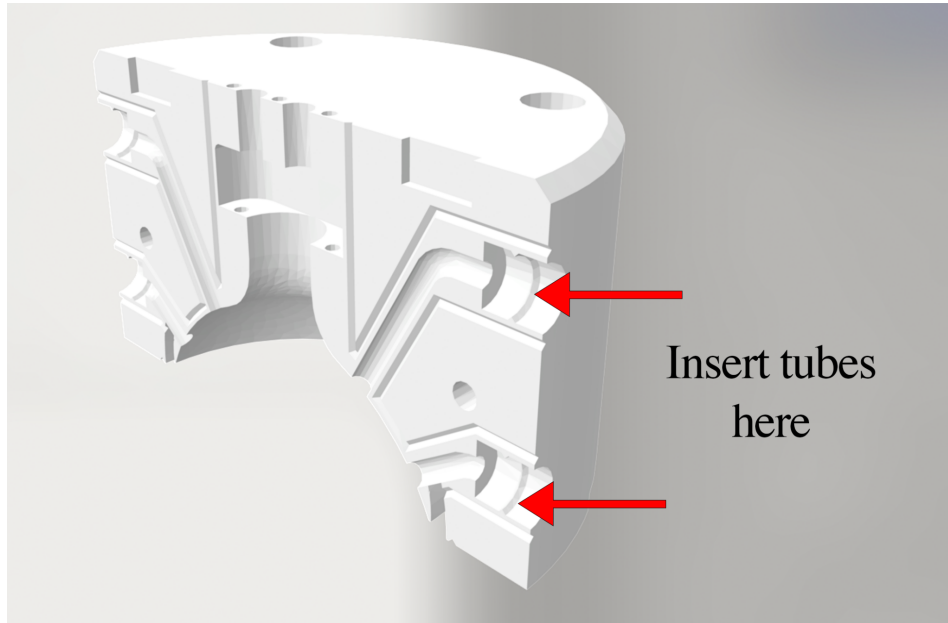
Mold for pouring a suction cup with tubes for inserting silicone called out.
